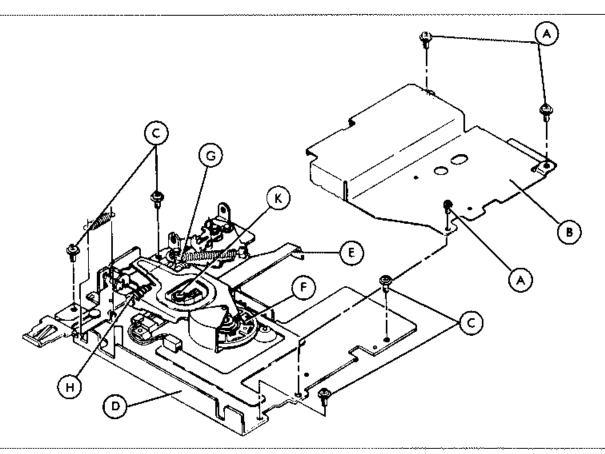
COLLET, SUBFRAME, AND INDEX SENSOR REMOVAL/REPLACEMENT
